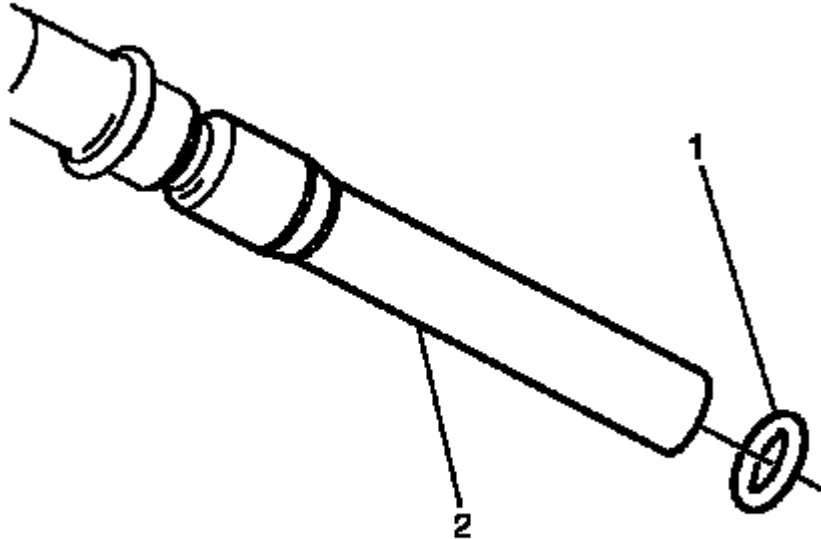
Identifying Oil Level Indicator Tube & O-Ring
